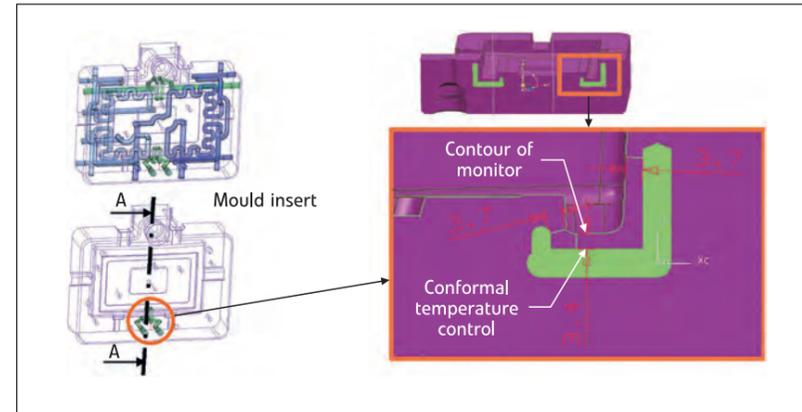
The conformal mould cooling conceals the weld in the exposed high-gloss area
